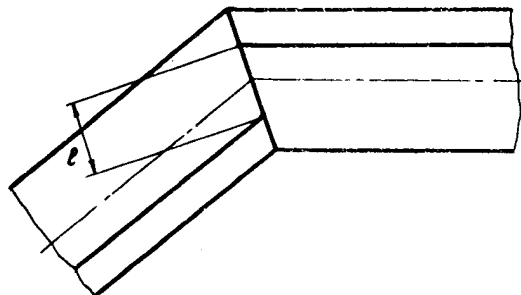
Location of welded joints on sector pipe-bends, $l \geq 100$ mm
